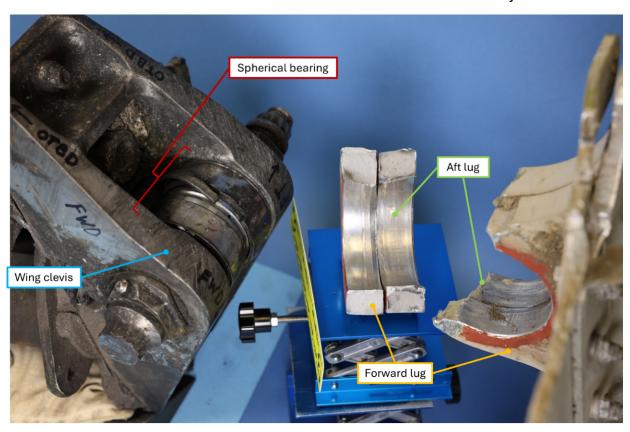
The left pylon aft mount, the fractured and separated forward and aft lugs, and the left wing clevis containing the attachment hardware and fractured spherical bearing.
